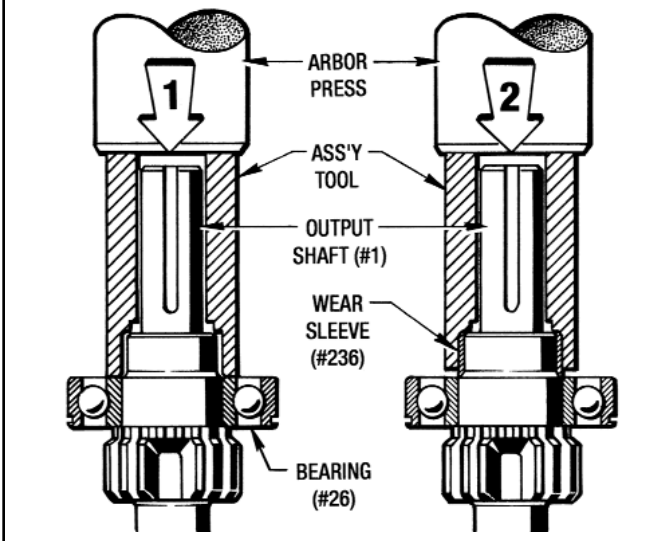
Installing Bearing & Wear Sleeve/Mating Ring
